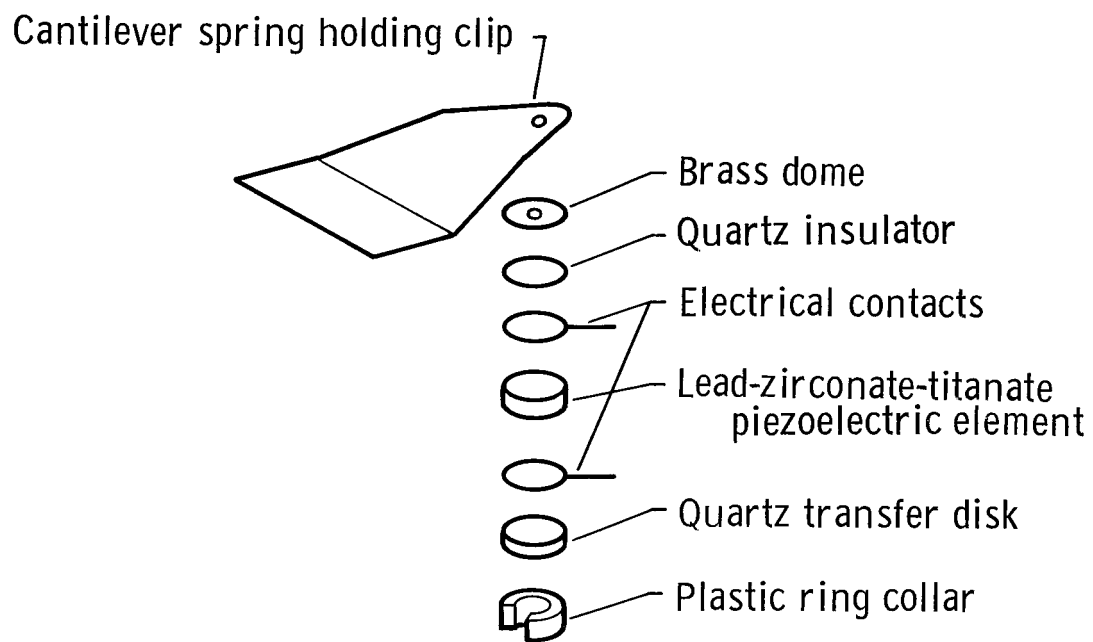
Exploded view of piezoelectric impact-detector assembly.
